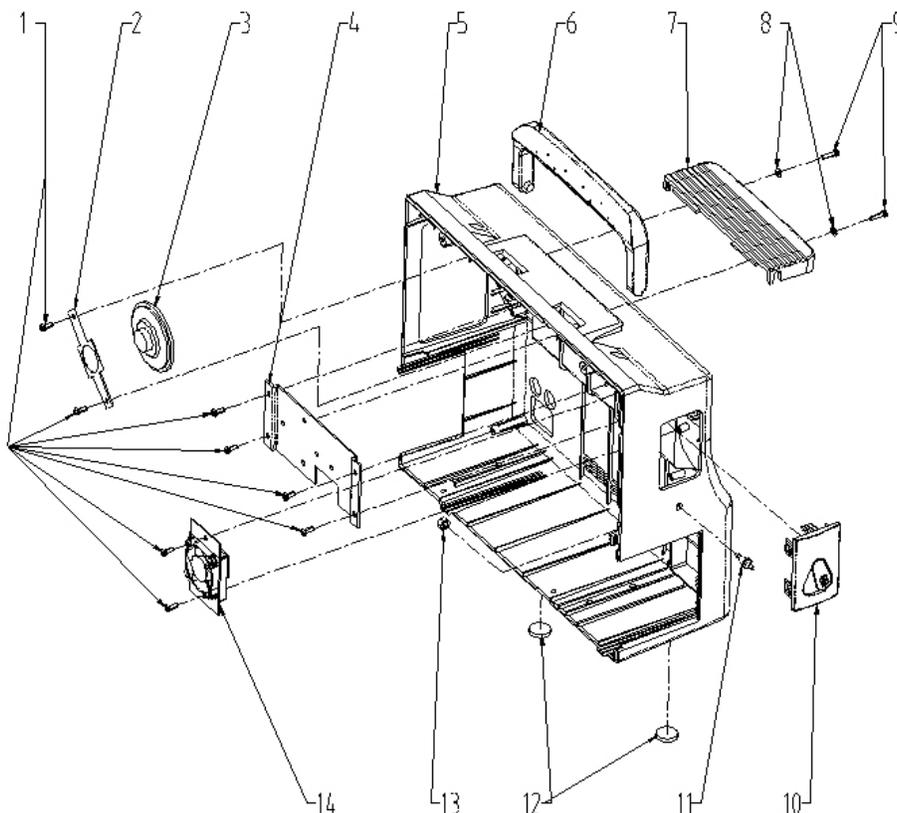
Back cover assembly (microstream CO₂) (9201-30-35992)
